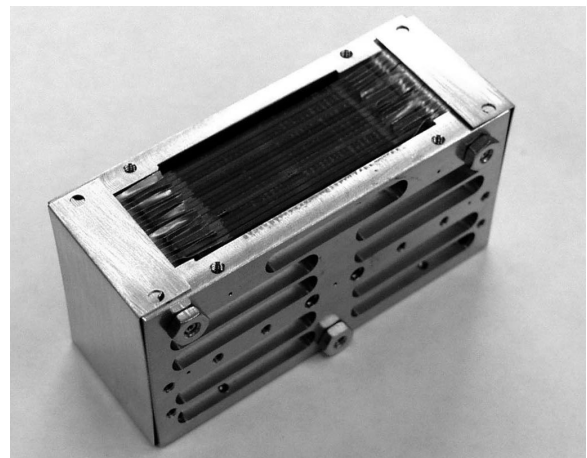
Stages in the assembly of the SAFIRE 16x32 bolometer array. The assembly pictured above is a mechanical prototype; the complete array will also have wires soldered to the circuit boards to make electrical connections, which are brought of the light-tight package through baffles to connectors mounted on the rear.
